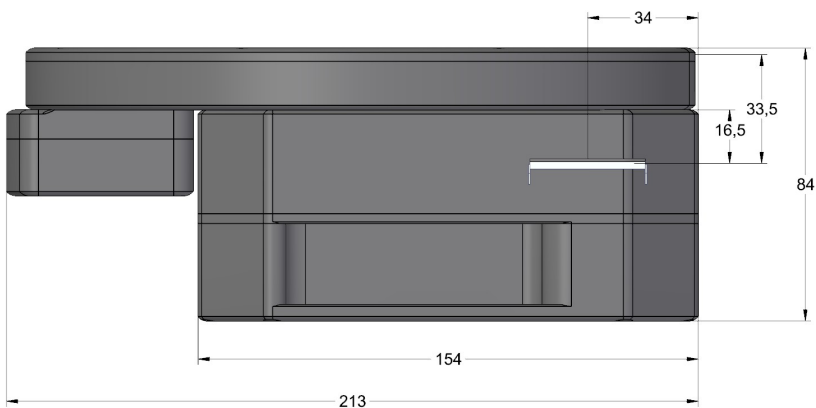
G3 camera with standard cooling and “S” size external filter wheel side view
